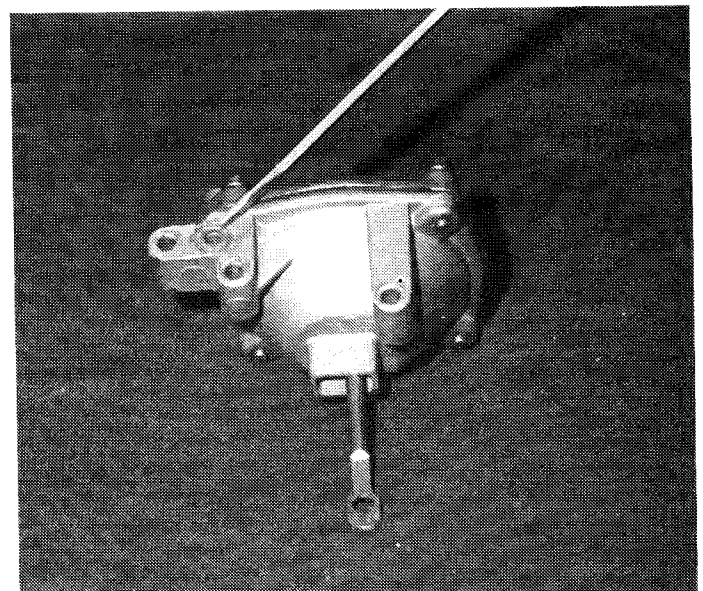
Make sure cork gasket in secondary diaphragm housing seals properly with vacuum passage in main body.
